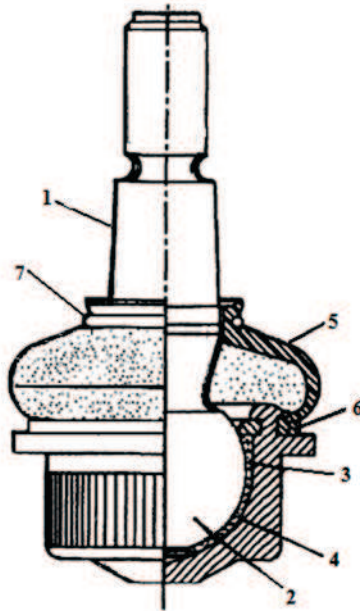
The ball joint assembly. 1 - stud, 2 - ball, 3 - grease, 4 - socket, 5 - elastomeric boot, 6, 7 - lower and upper clamping rings
